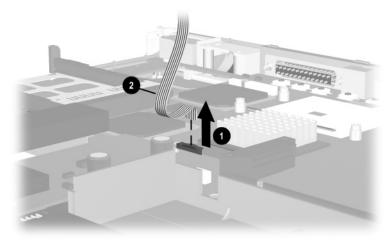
Removing the System Board-to-TouchButton Board Cable
